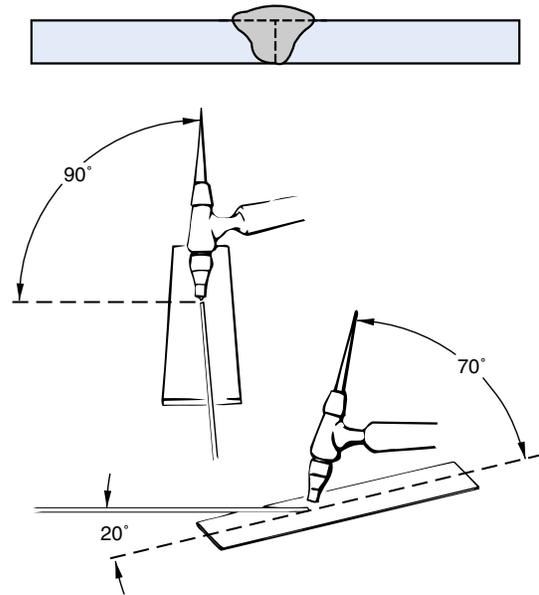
Welding the butt weld and stringer bead.
